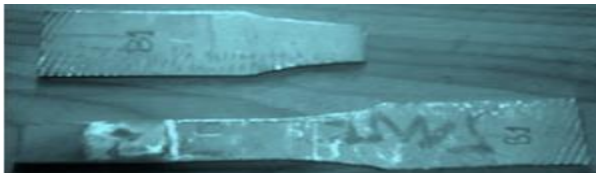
(e) Broken tensile specimen welded by MIG welding using ER309L filler metal
